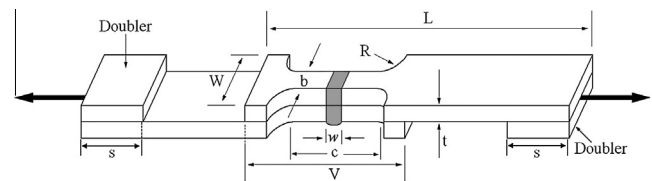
A schematic of a lap-shear specimen with the loading directions shown as the bold arrows.
